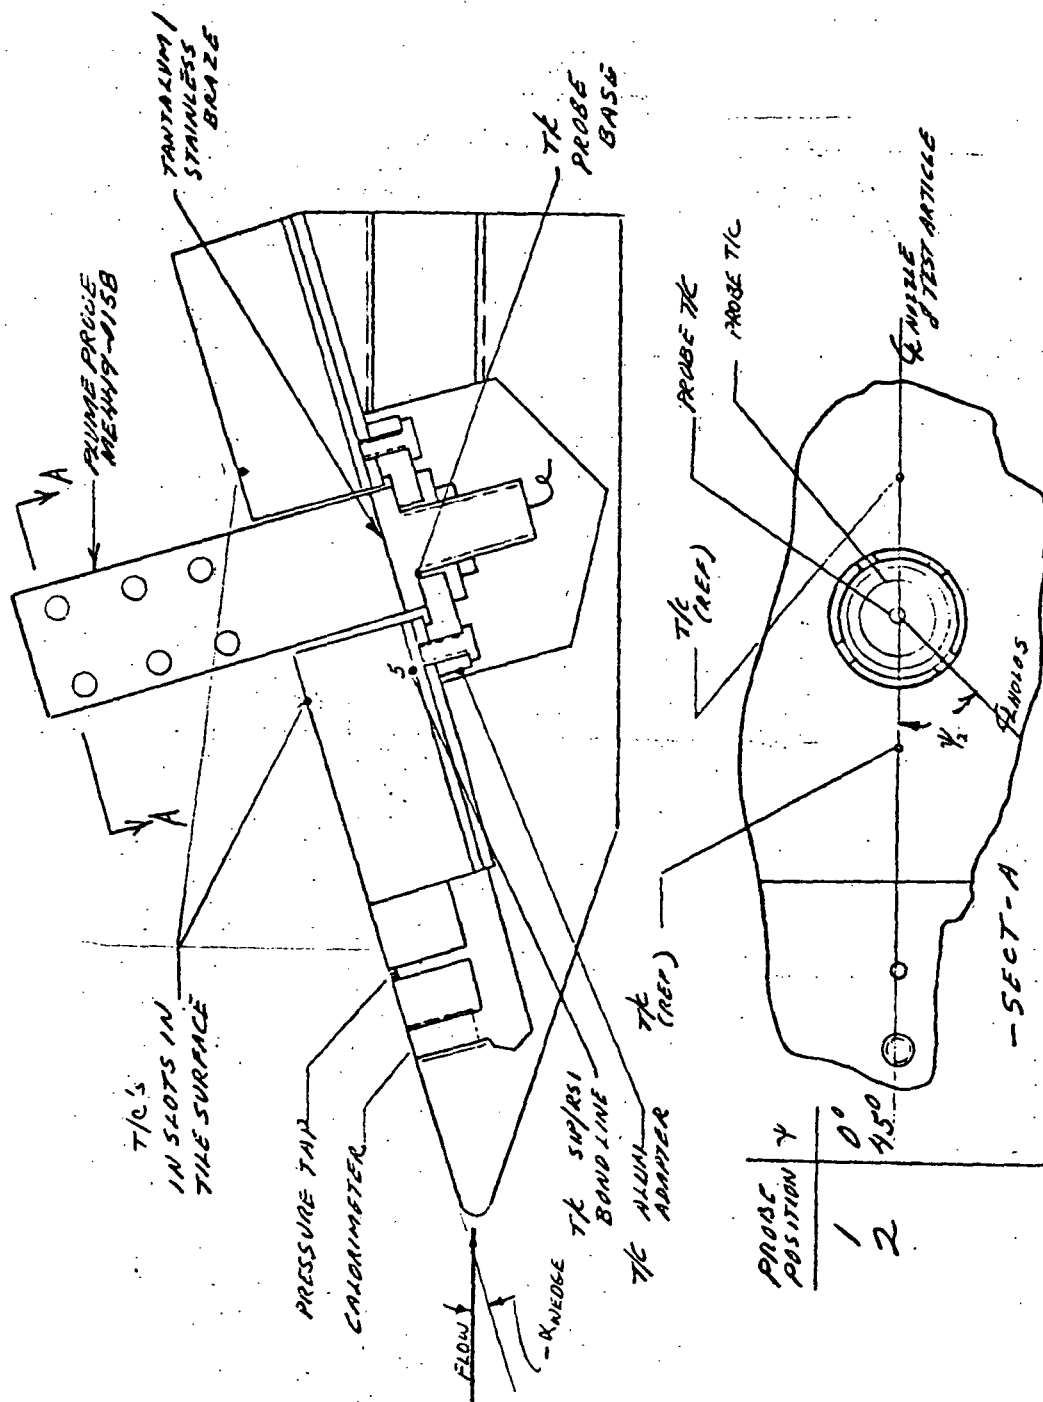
DFI gas temperature probe/aluminum carrier assembly.
